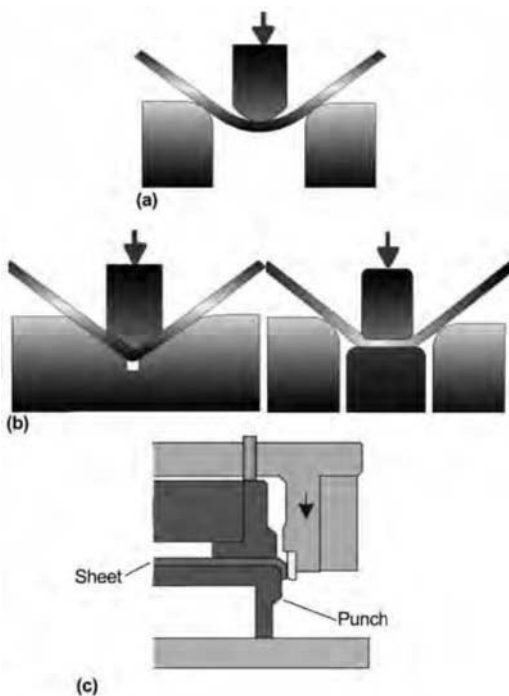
Bending: (a) air bending; (b) die bending; (c) edge bending. Source: Ref 2.4
